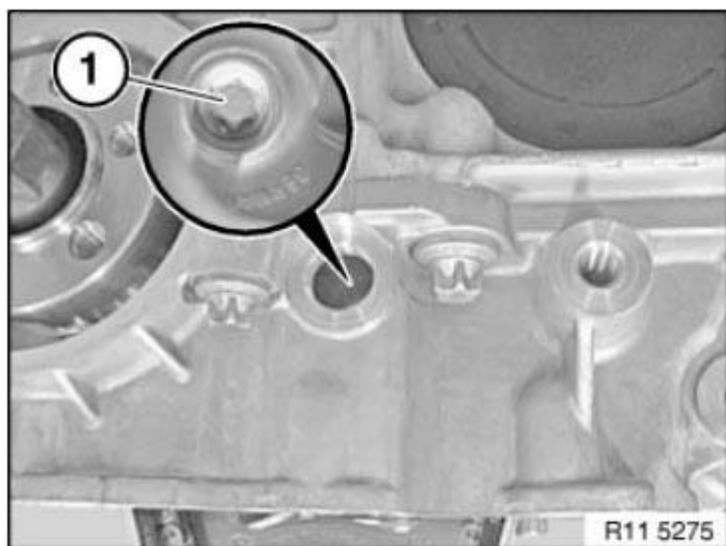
Identifying Oil Pump Triangular Drive Screw
